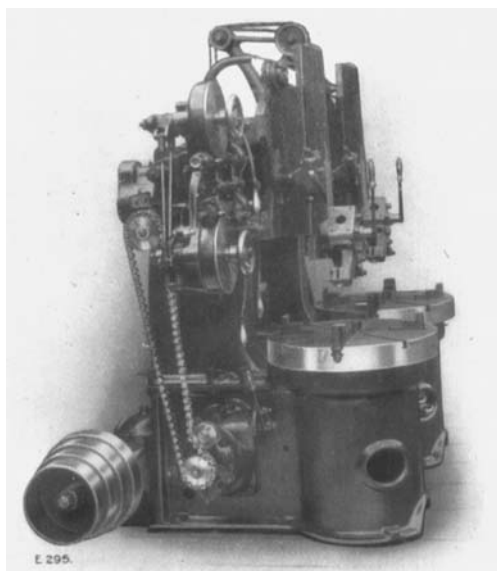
36 in. Duplex Table Type of Vertical Boring and Turning Mill.
